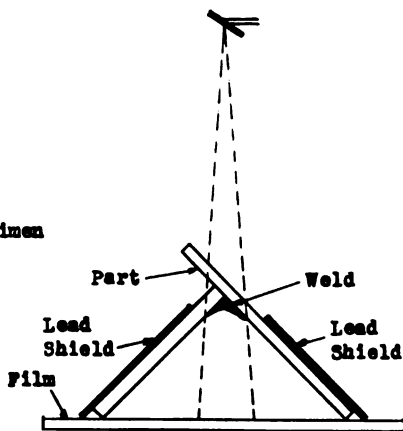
Arranging the Film For Fillet Weld Exposure. Field Outside of Weld Is Shielded to Prevent Scattered Radiation.
